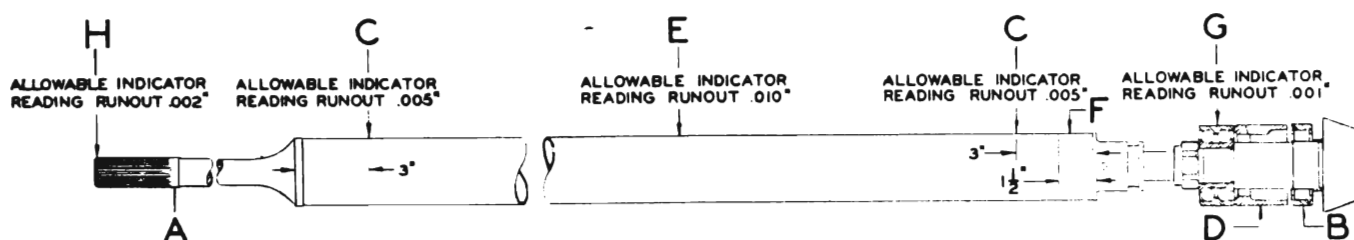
Propeller Shaft Run-Out Specifications—Series 40-50-60-70
